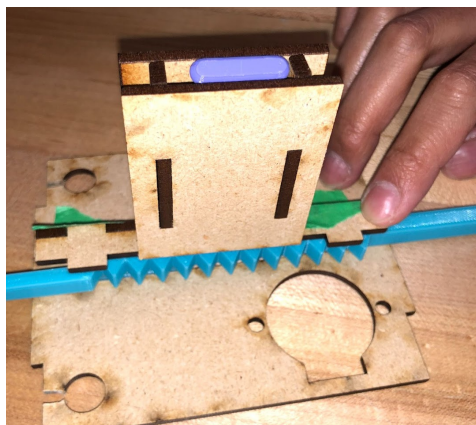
Vertical shaft filled with 3-D printed pill models
